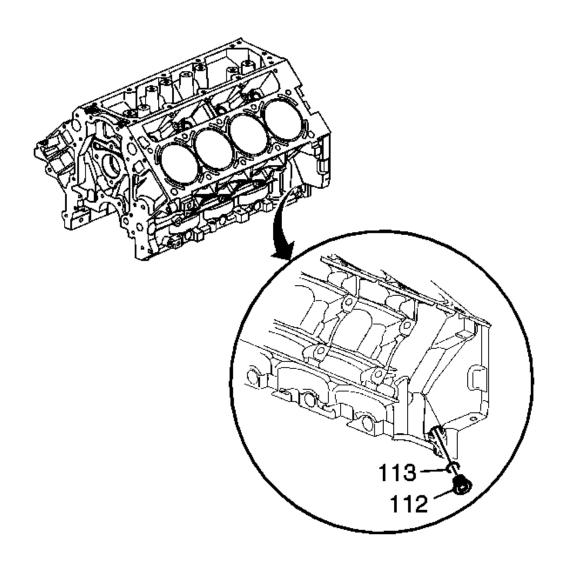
Locating Engine Block Left Rear Oil Gallery Plug & Seal Courtesy of GENERAL MOTORS CORP.
